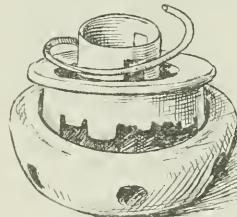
Showing corrosion of button and loosening of the wire spring.
